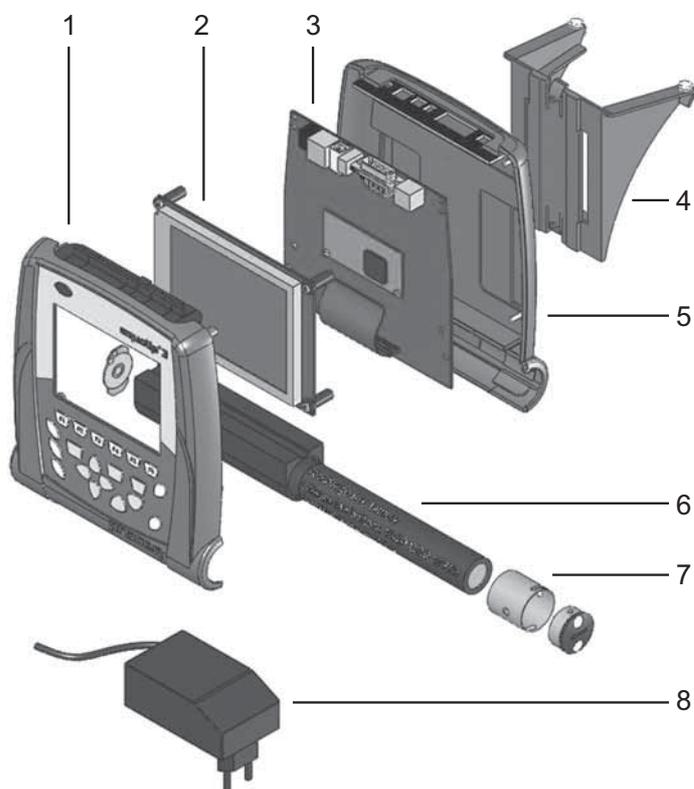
Explosion drawing EQUOTIP® 3 indicating device
